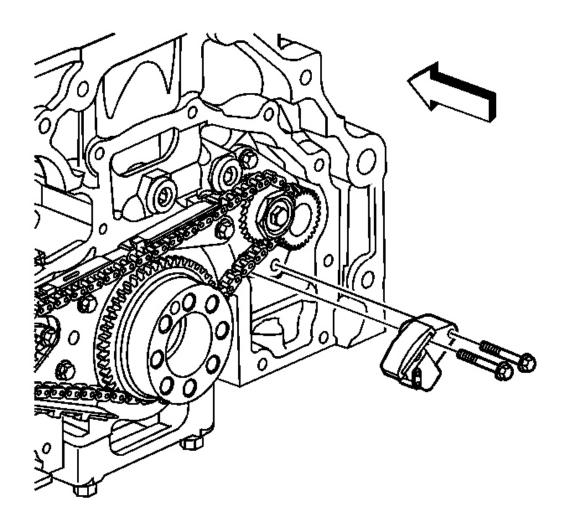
View Of Balance Shaft Chain Tensioner Courtesy of GENERAL MOTORS CORP.
